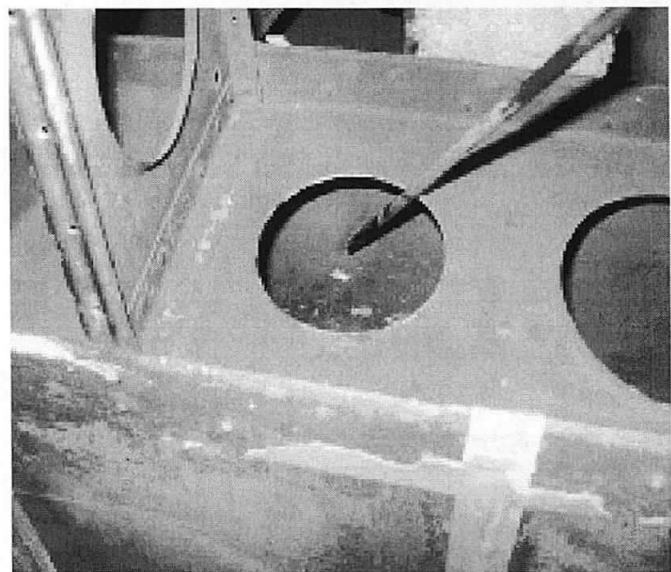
Intergranular corrosion with failed rivet head beneath paper masking tape. This rivet head was easily removed with a finger nail!
